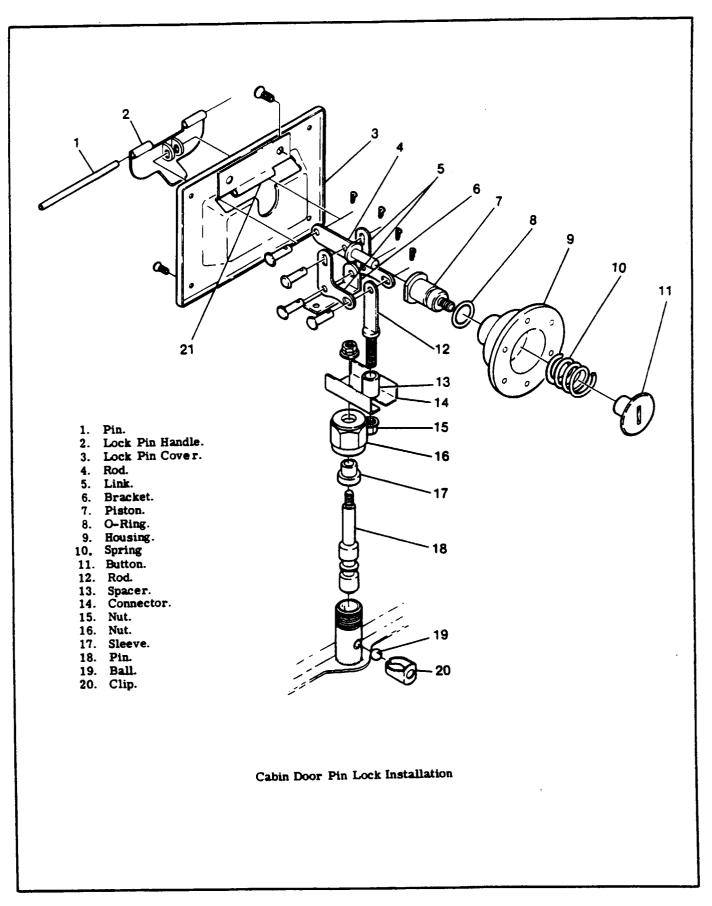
Door Latch Mechanism (Sheet 1 of 4).
